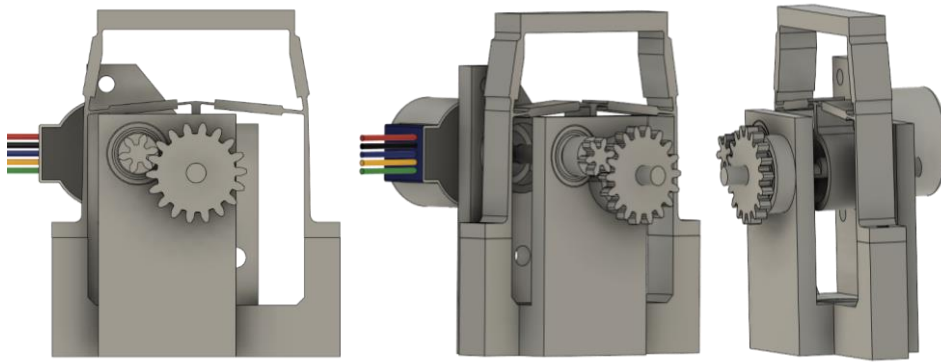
Front and side views of the JWST Mirror fine positioning mechanism as designed by Polyfractal [12]
